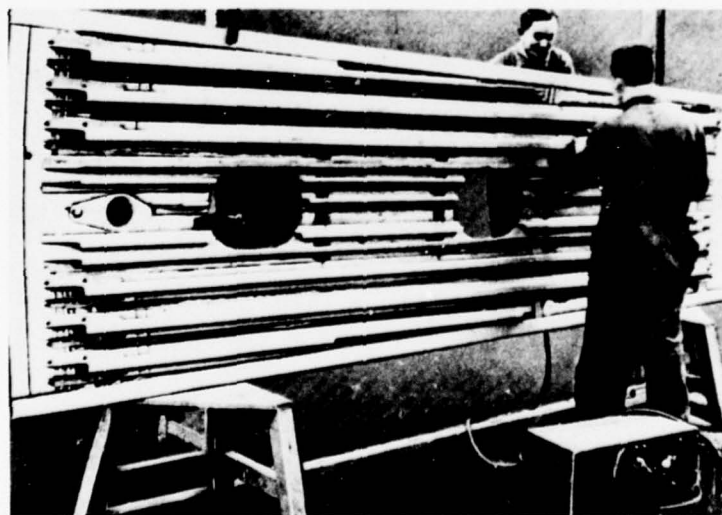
Adhesive bonded stiffening sections in an airfoil
